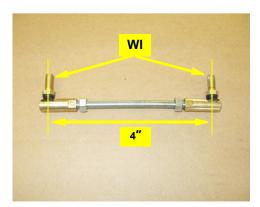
ii: Assembled threaded rod - 2nd axle type
